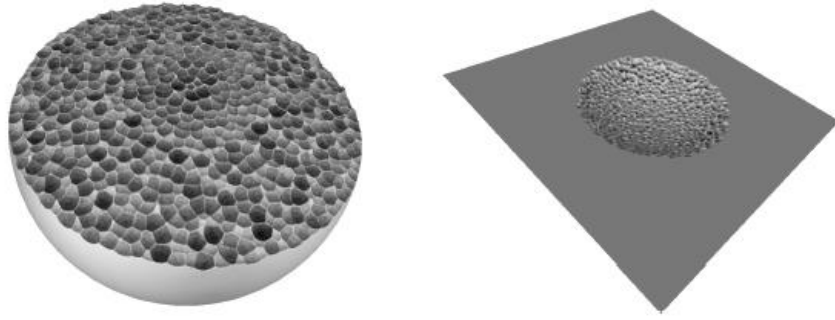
the NURBS surfaces after the simulation of the tool (left) and the workpiece (right).
